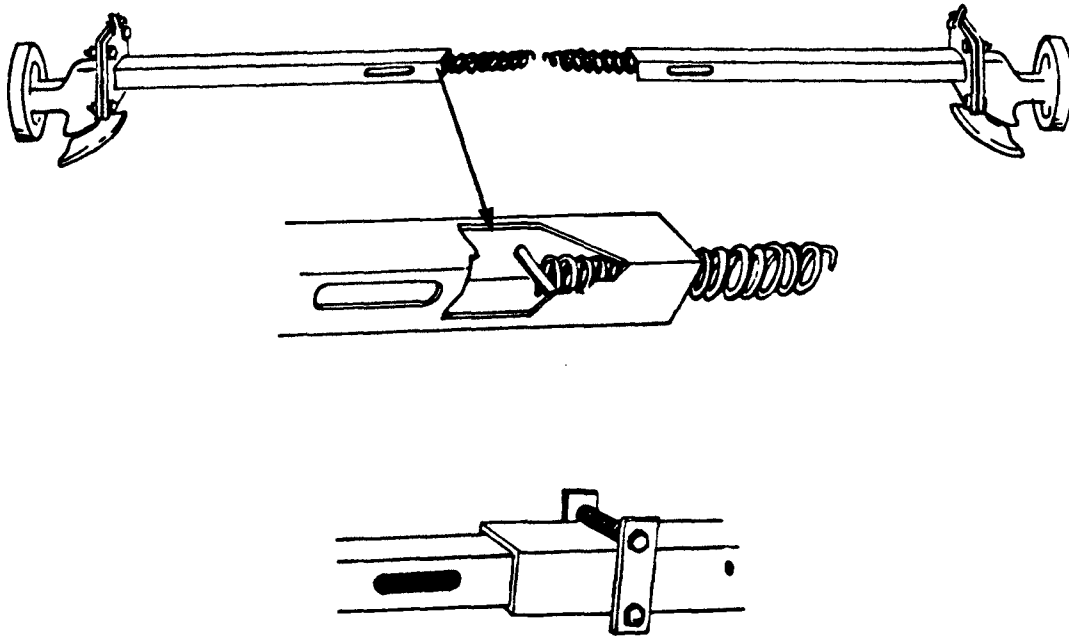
AXLE ASSEMBLY ILLUSTRATING SPRINGLOAD
